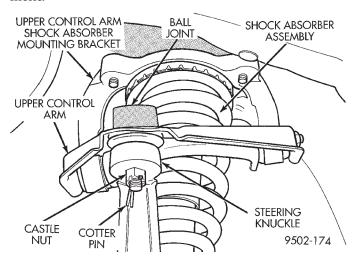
Upper Ball Joint Attachment To Steering Knuckle
